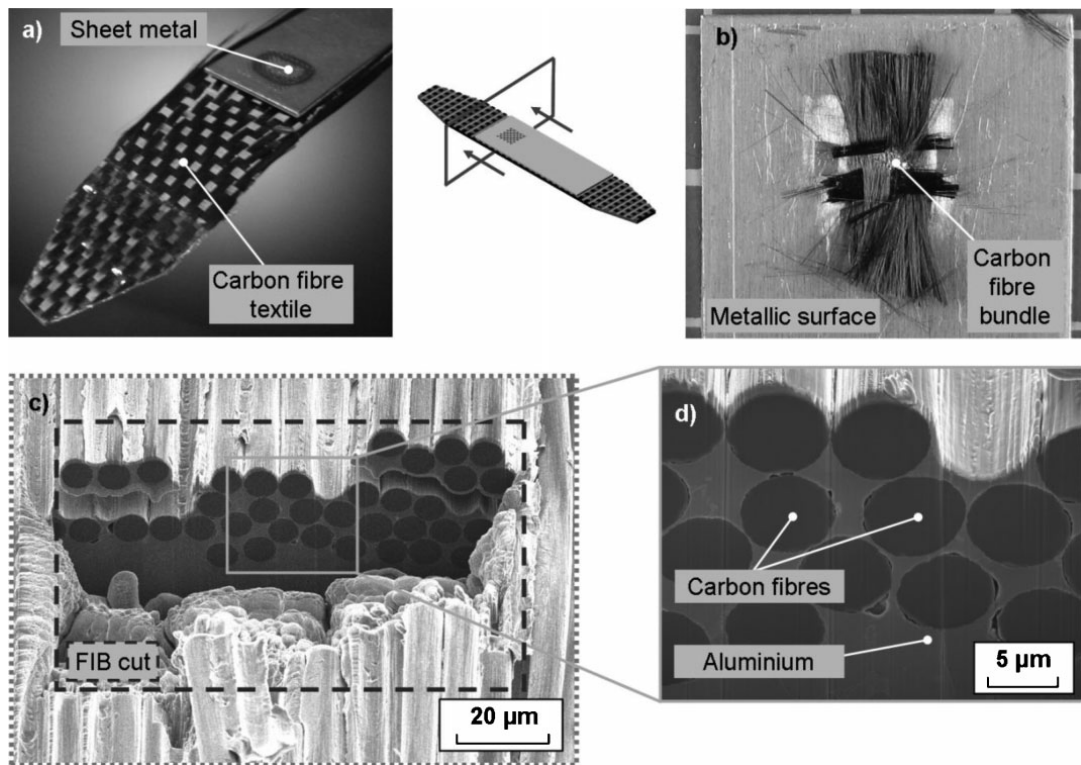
Metal/carbon fibre textile-joint: (a) specimen, (b) back view of a prepared joint, (c) focused ion beam cut through the welding zone, and (d) SEM micrograph of the welding zone [68].
